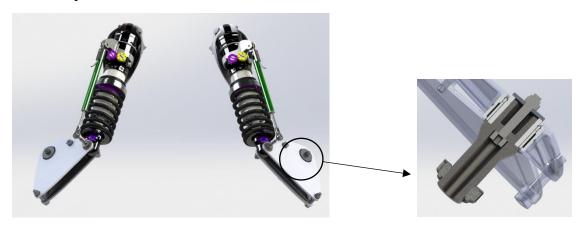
Front Suspension Assy & Rocker Bolt Assy Structure
